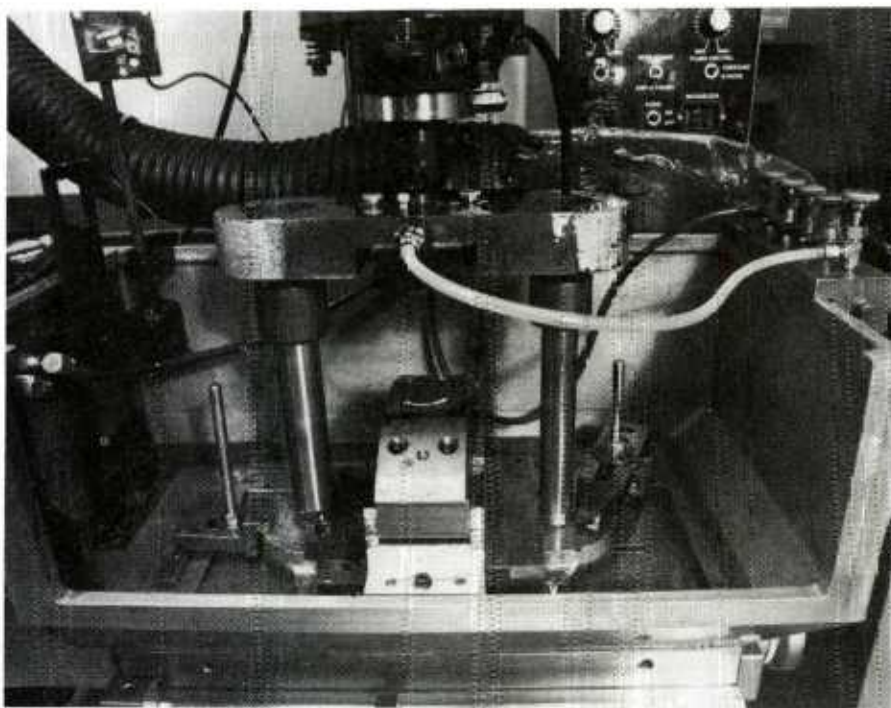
Roll Forge Die Sinking by Electric Discharge Machining
